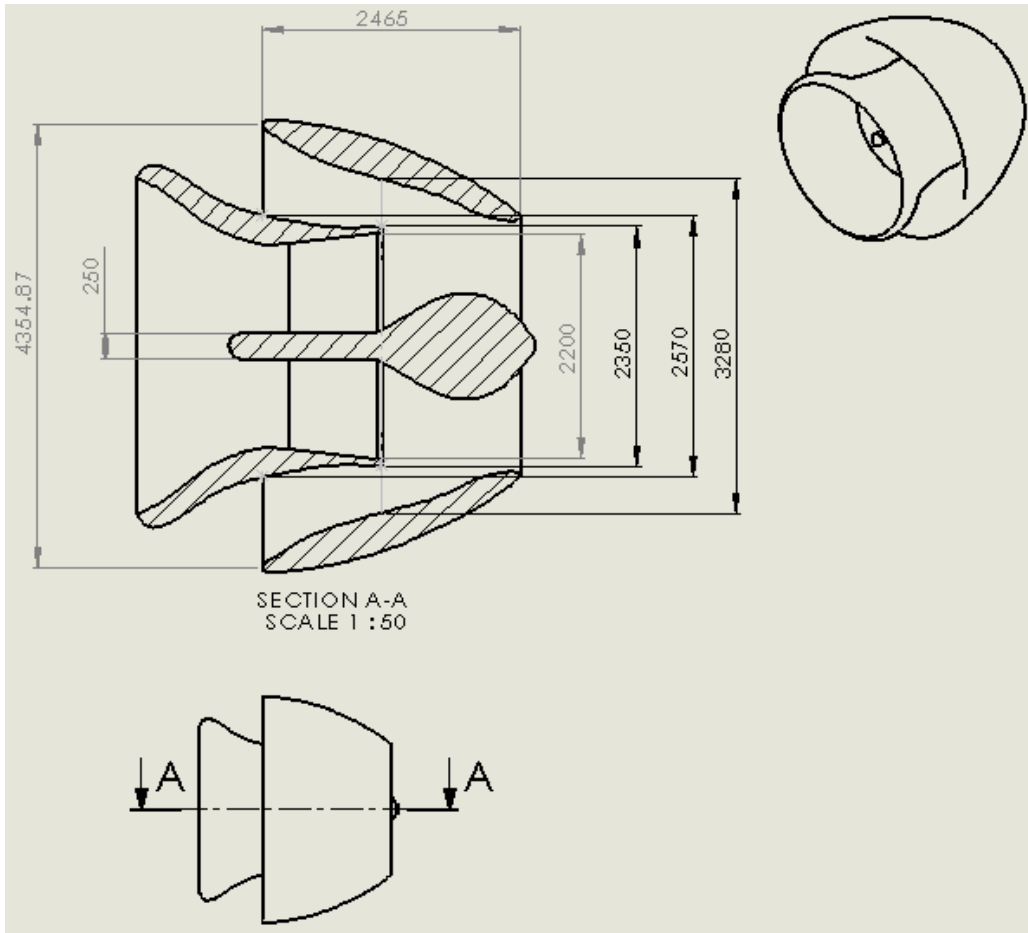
Dimensioned inner and outer shrouds complete with generator fairing
